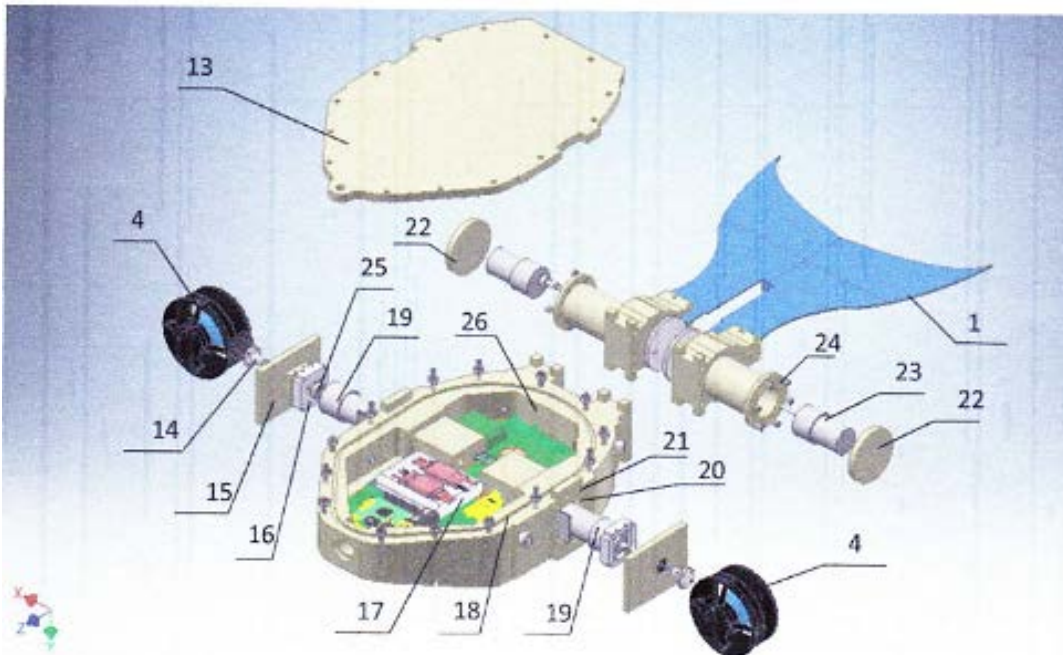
Exploded view of the vehicle assembly to show some of the key components of the vehicle.
